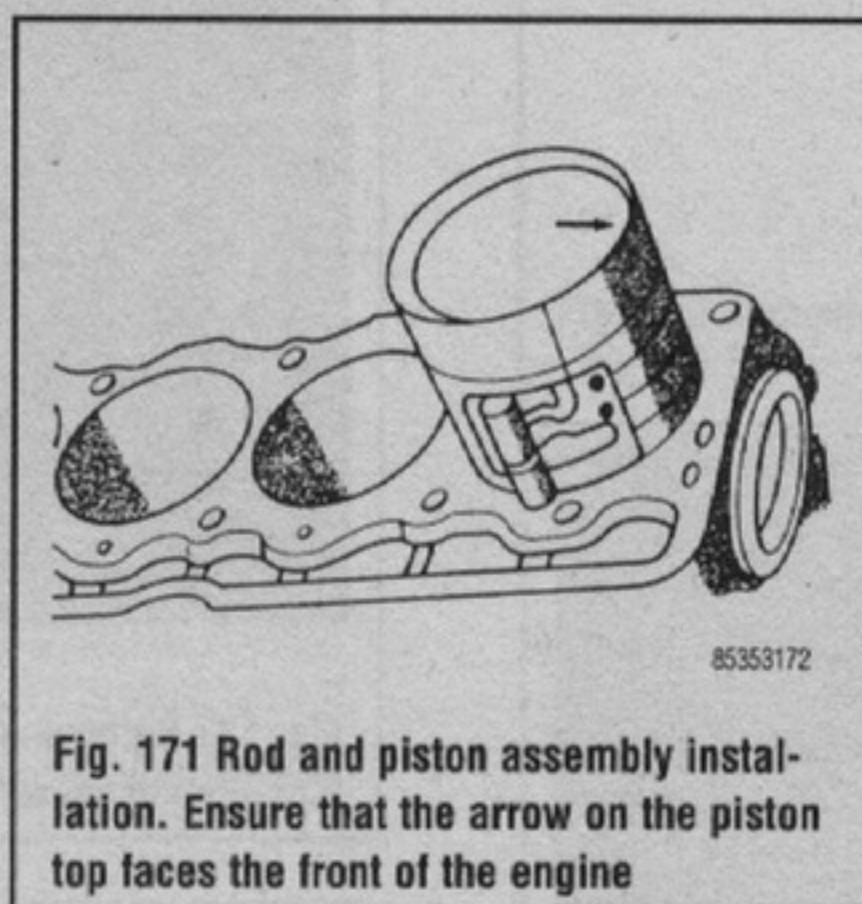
Rod and piston assembly installation. Ensure that the arrow on the piston top faces the front of the engine
